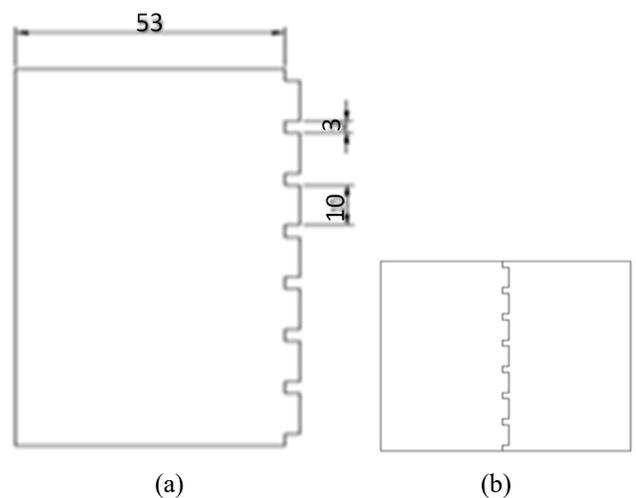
Square groove specimen (a) and (b) as welded
